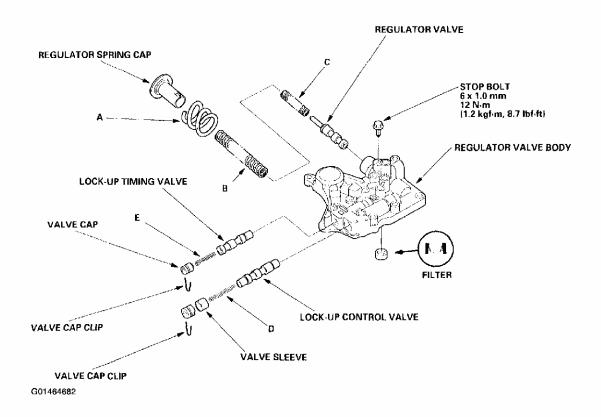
Exploded View Of The Regulator Valve Body Courtesy of AMERICAN HONDA MOTOR CO., INC.
